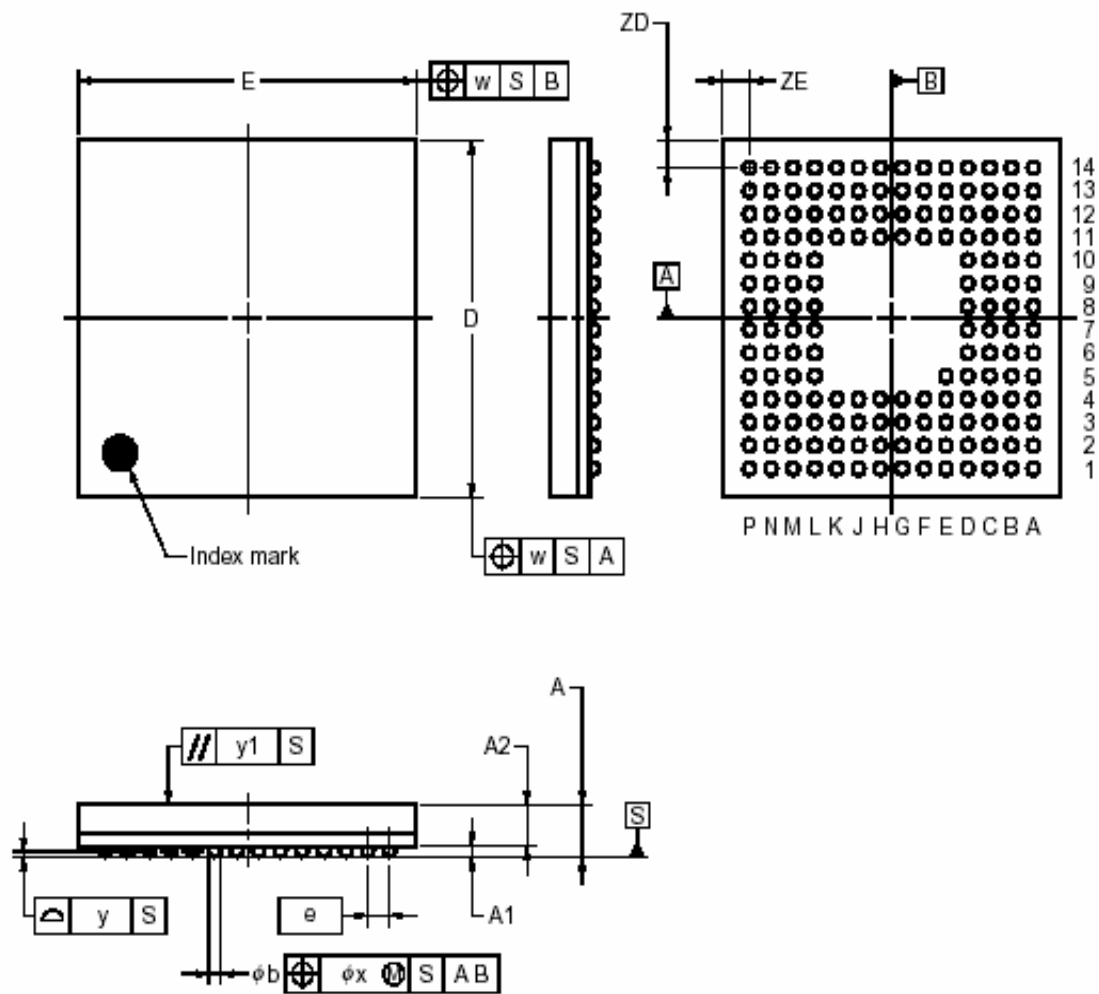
161-Ball FBGA Mechanical Drawing
